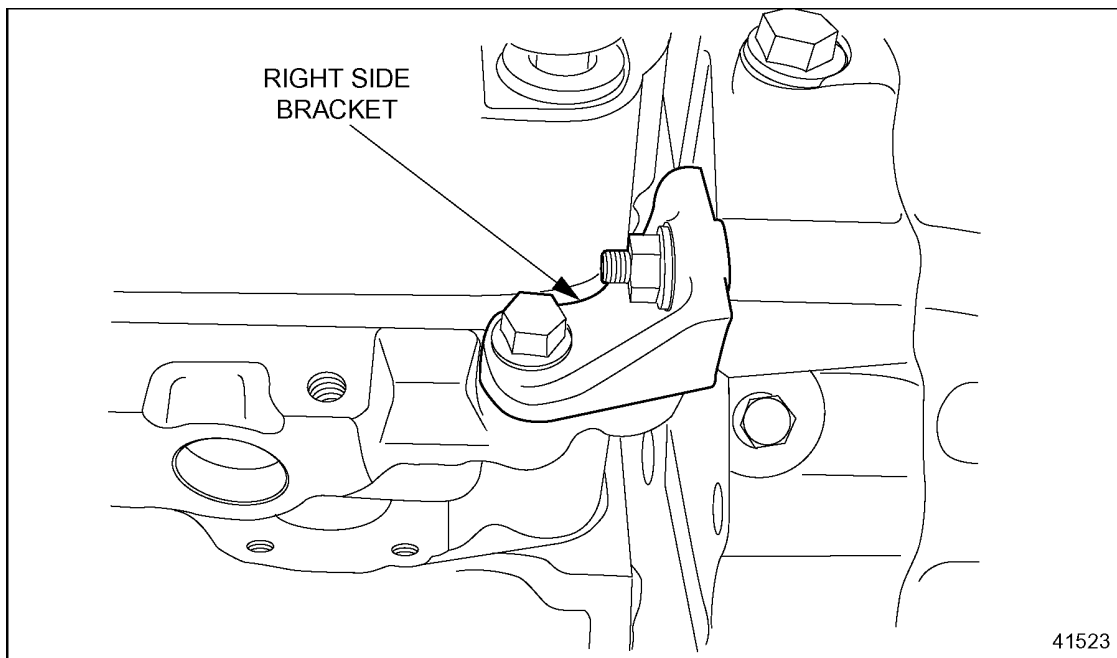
Gear Case Stiffening Bracket (Right Side)
